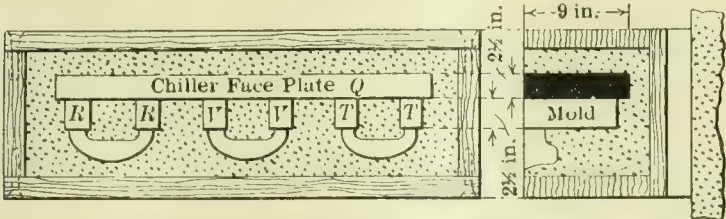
OPEN SAND MOULD FOR MAKING COMPARATIVE CHILLING TESTS.
